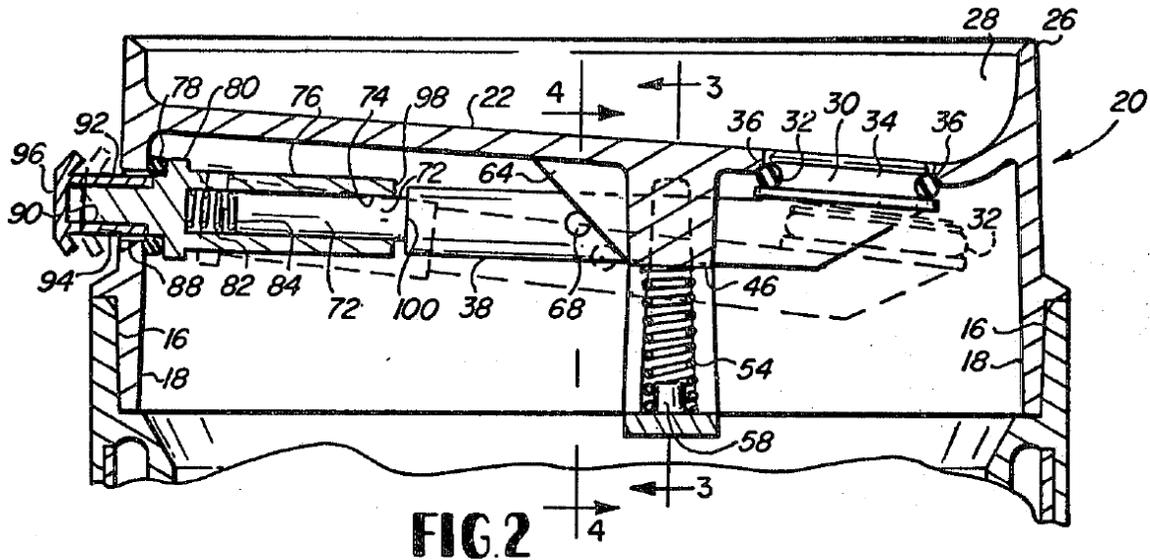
of Albert '748 is an enlarged fragmentary sectional view that illustrates a two-seal mechanism in which O-ring 78 unseals before O-ring 32 when knob 96 is pressed.
